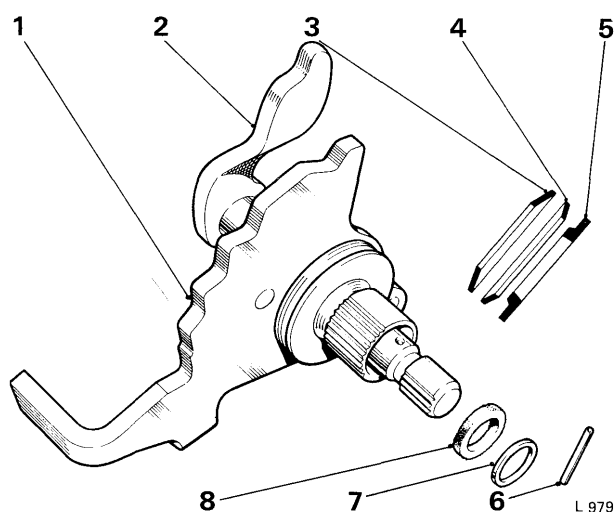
SELECTOR AND THROTTLE VALVE LEVERS
